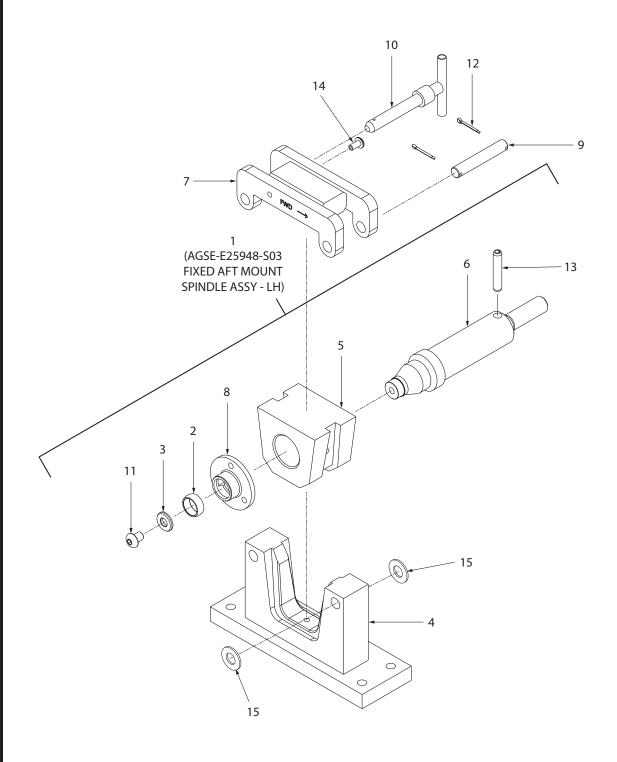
AGSE-E25948-S01 Fixed AFT Mount Assembly - LH
